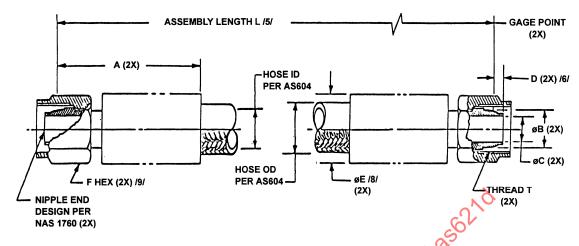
HOSE AND FITTING DIMENSIONS
